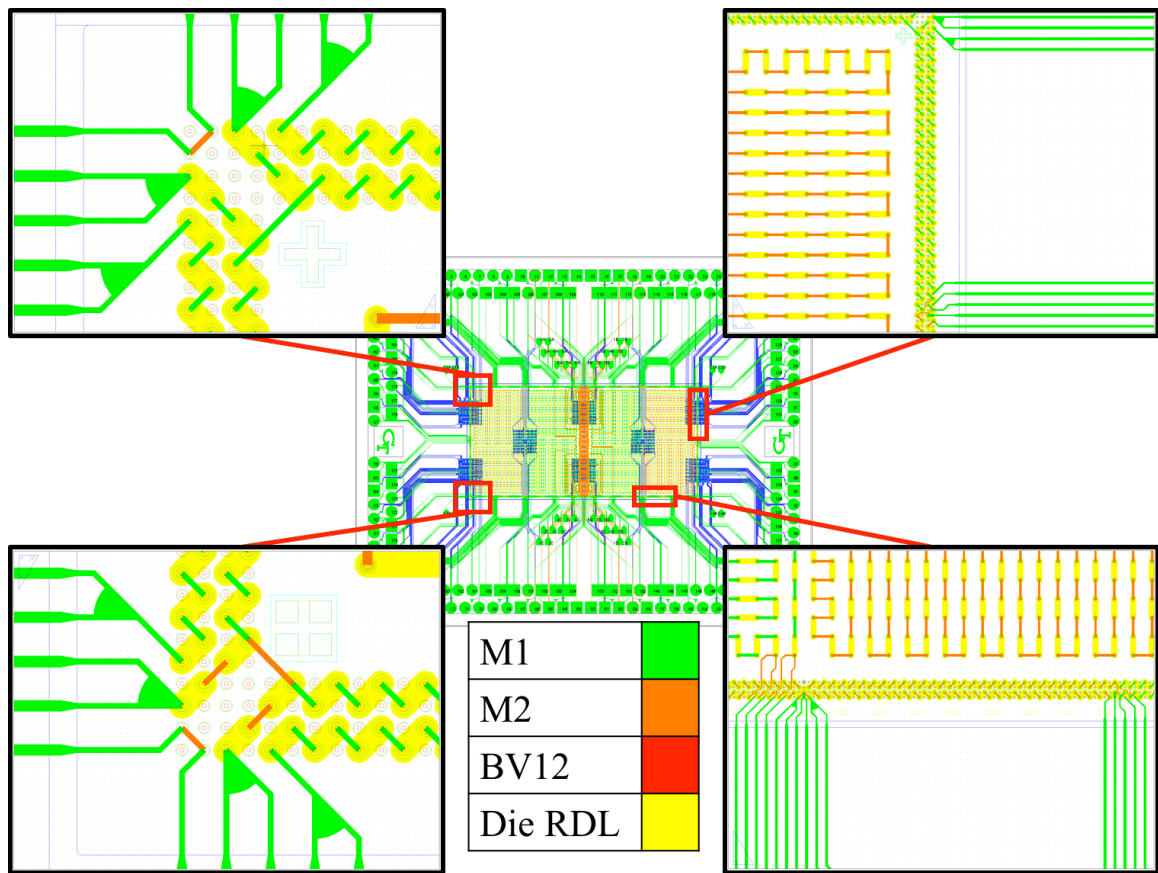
Chip-level assembly test structures at 56 μm bump pitch.
